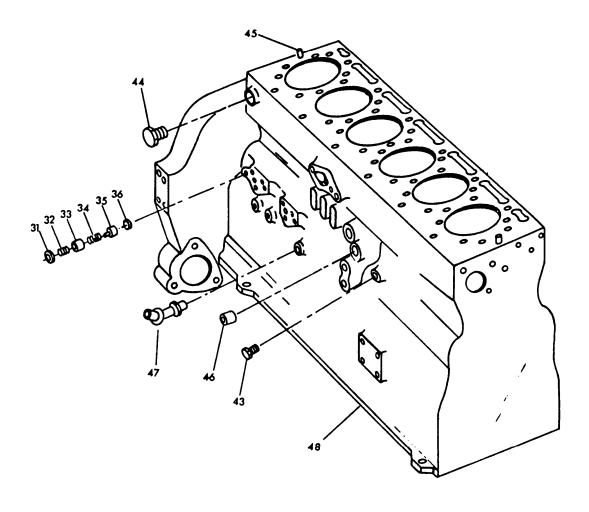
Piston, Crankshaft, and Block (sheet 2 of 3)
